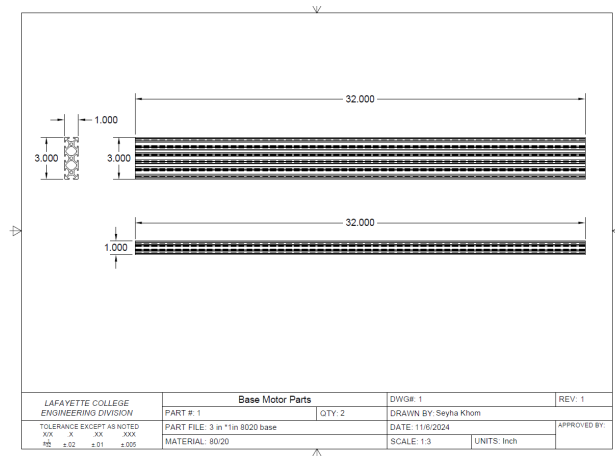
This is a drawing sent to the machine shop. This drawing is requesting from the machine shop to cut 80/20 that is 3 inches by 1 inch in size. There are two pieces cut both at 32 inches long. These pieces are used underneath the aluminum plate of the wheelchair to properly hold the motors and the front wheels.
